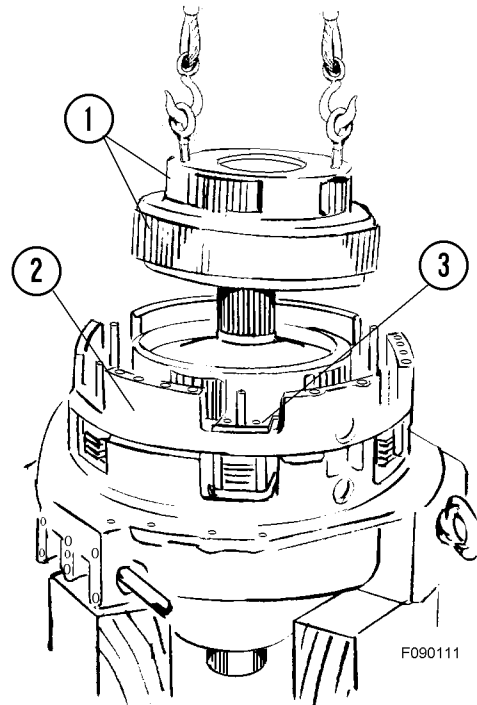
NUMBER FOUR CARRIER ASSEMBLY REMOVAL
